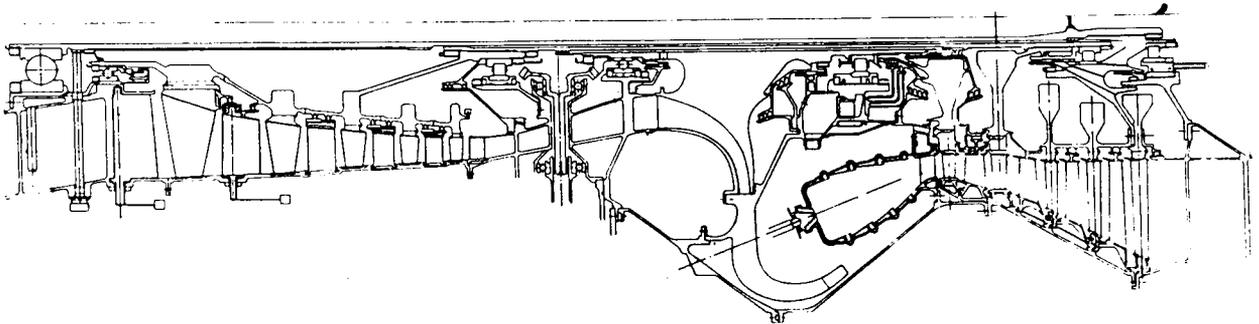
Mechanical Cross Section of the Three-Spool Engine with Axial/Centrifugal Compressor (STS646)- The major features include a large thrust bearing to support the power turbine shaft, inlet case struts with variable trailing edge flaps, a centrifugal impeller, and a piggyback bearing arrangement. (J27638-908)
